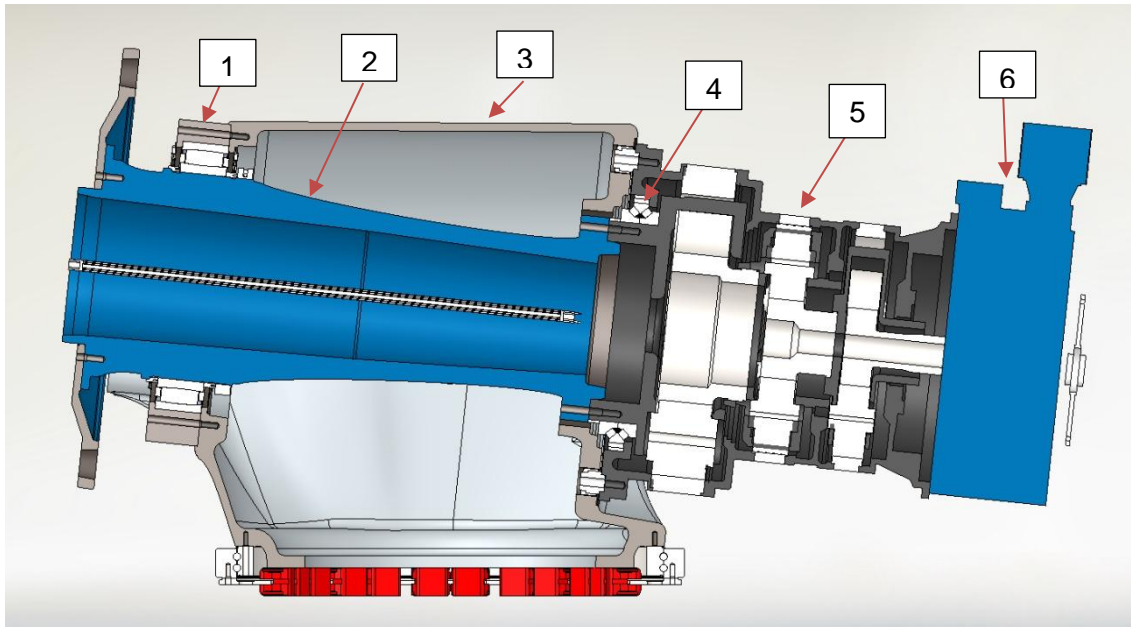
bewind drivetrain as midspeed version, toroidal roller bearing on rotor site (1), rotor shaft (2), main-frame (3), preloaded tapered roller bearing integrated in gearbox in O- arrangement (4), 3 stage coaxial planetary gearbox (5), MS Generator (6) Source bewind
